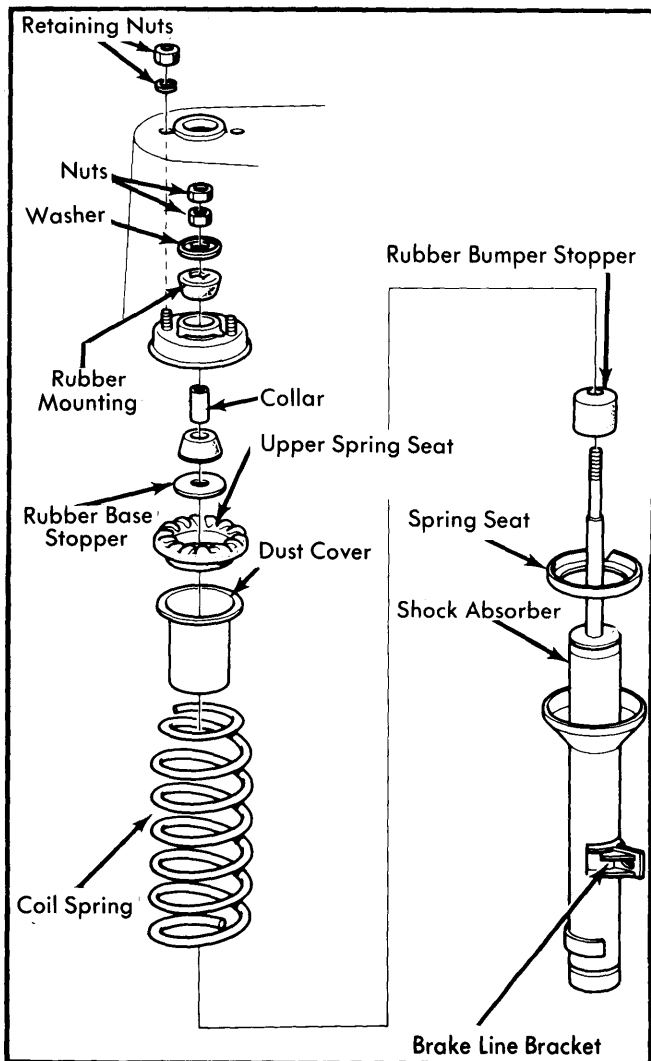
Exploded View of Accord Shock Absorber Assembly - Other Models Are Similar
